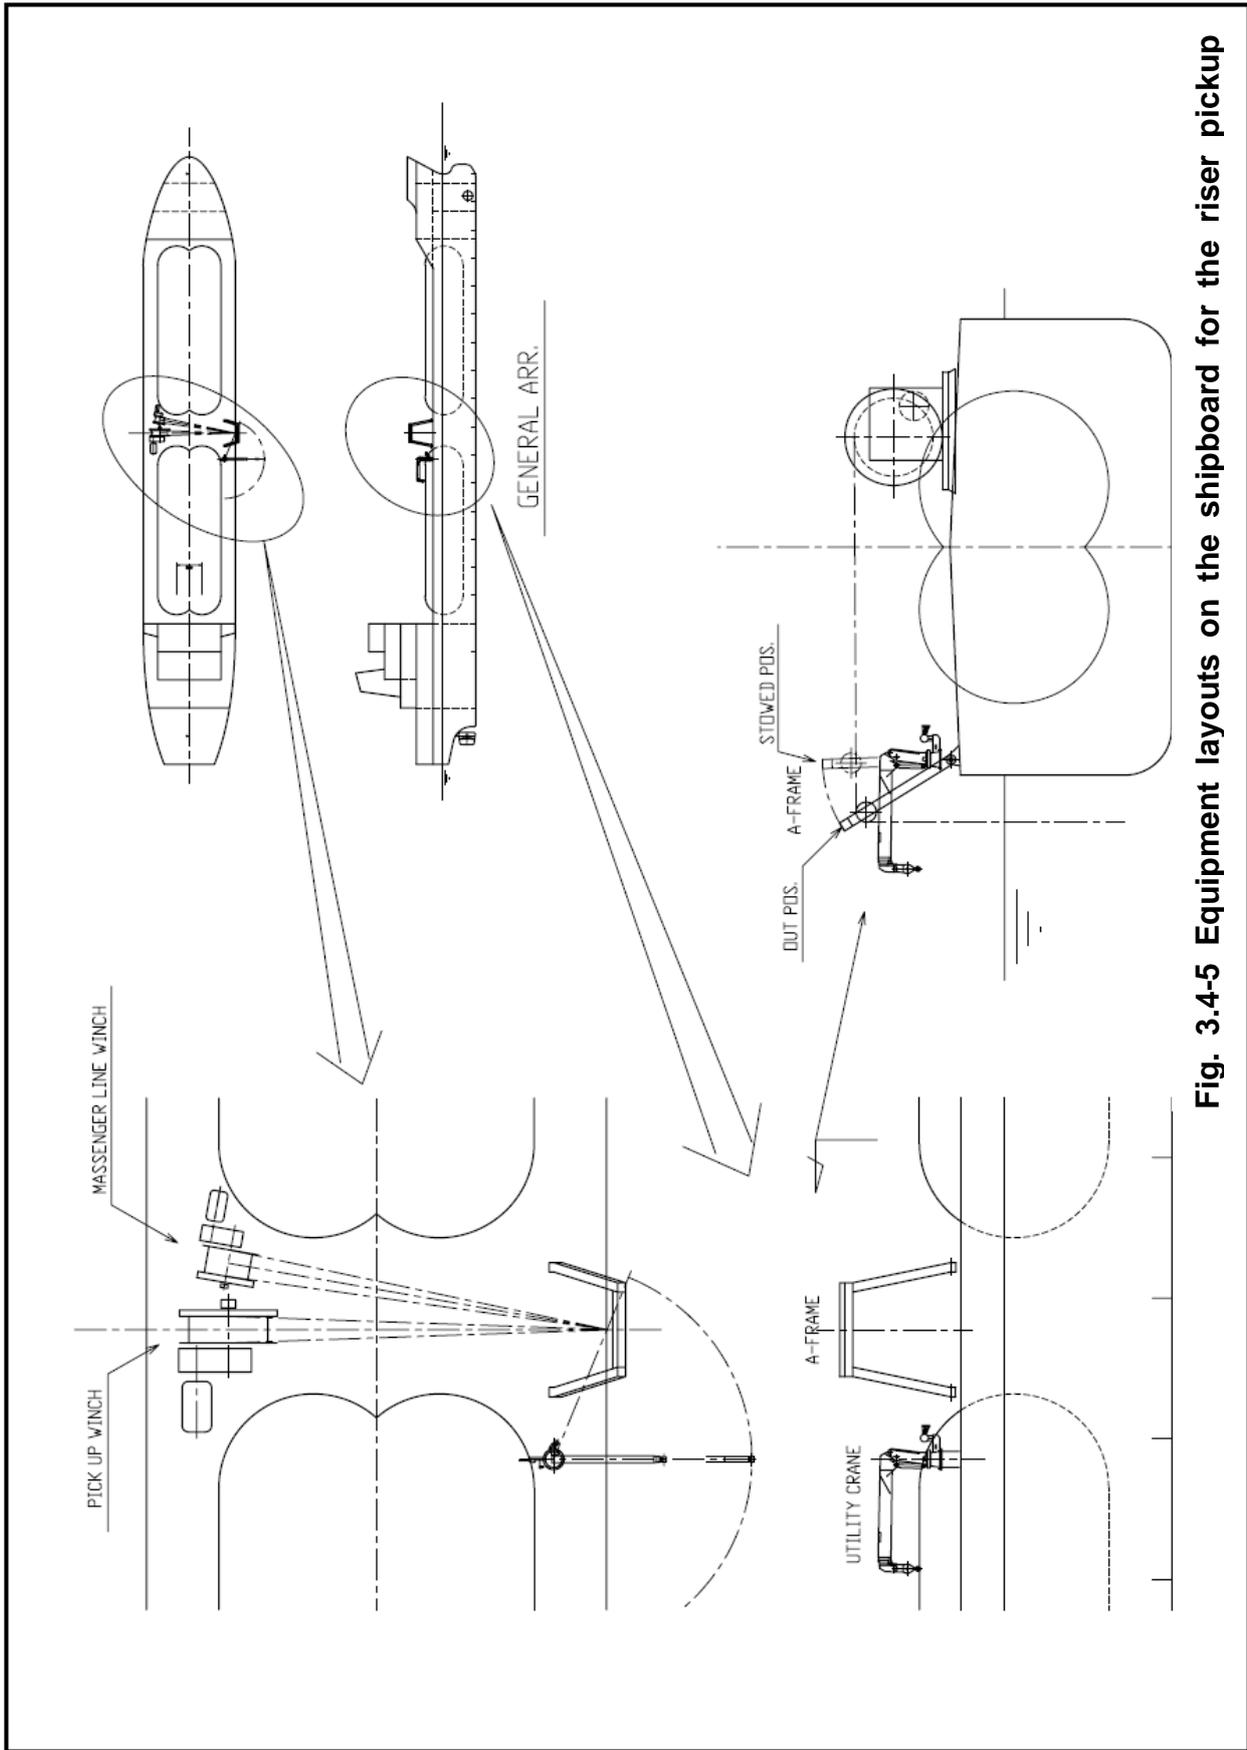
Equipment layouts on the shipboard for the riser pickup
